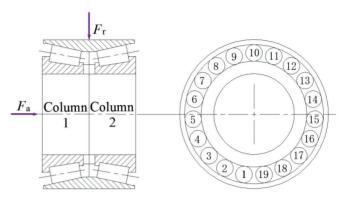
Schematic of the Double Row Conical Roller Bearing Loads and Roller
